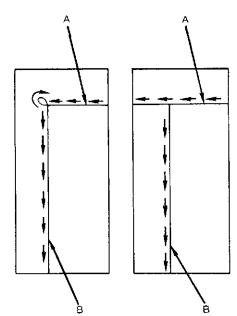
Here are two methods for cutting an exterior corner. In the first method, cut line A; then loop around in the waste stock to cut line B. In the second, cut line A and continue past the corner to the edge of the workpiece. Turn the workpiece and cut in from the edge to line B.
